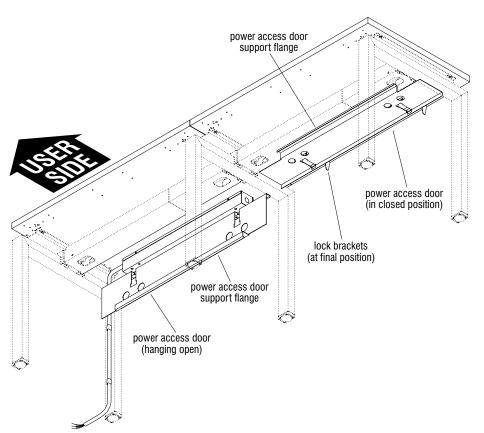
Single-Sided Fixed Benching Hardwire Power Access Door Installation
